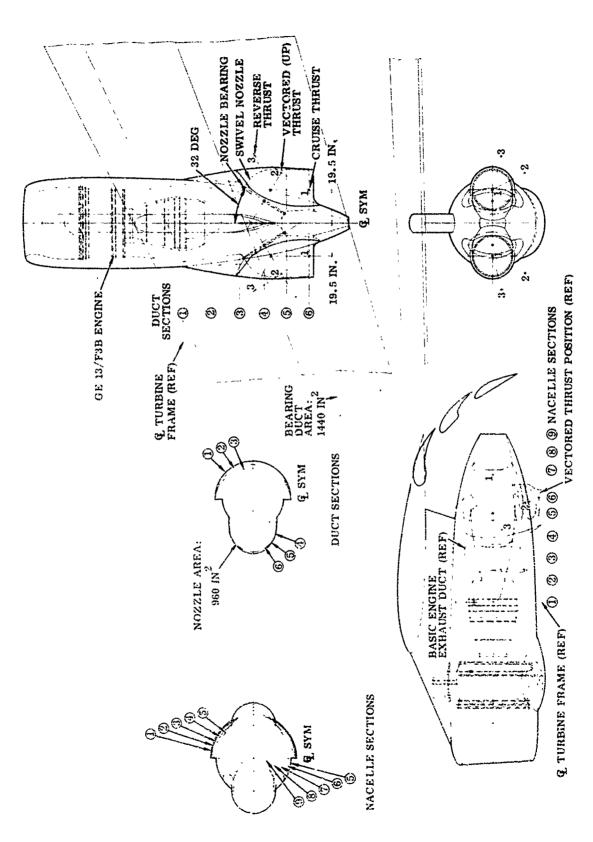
Dual Single-Bearing Nozzle Thrust Deflector (GE113 F3B Engine)
